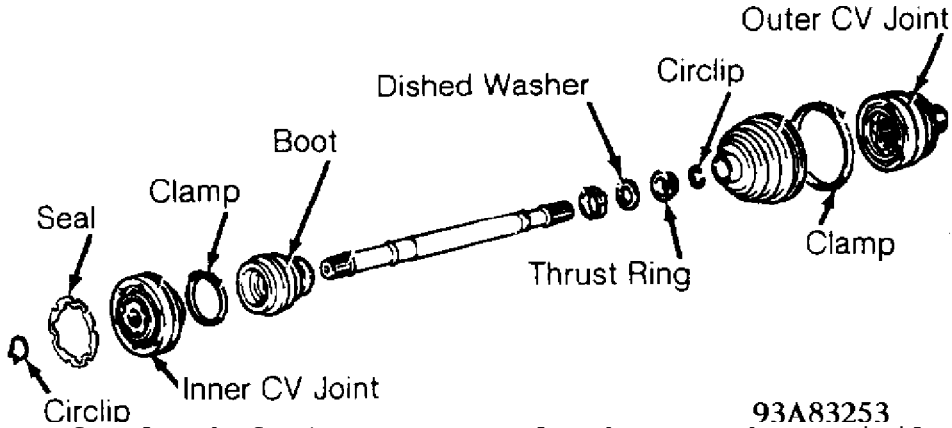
View Of Axle Shaft (Man. Transaxle Shown; Others Similar)
